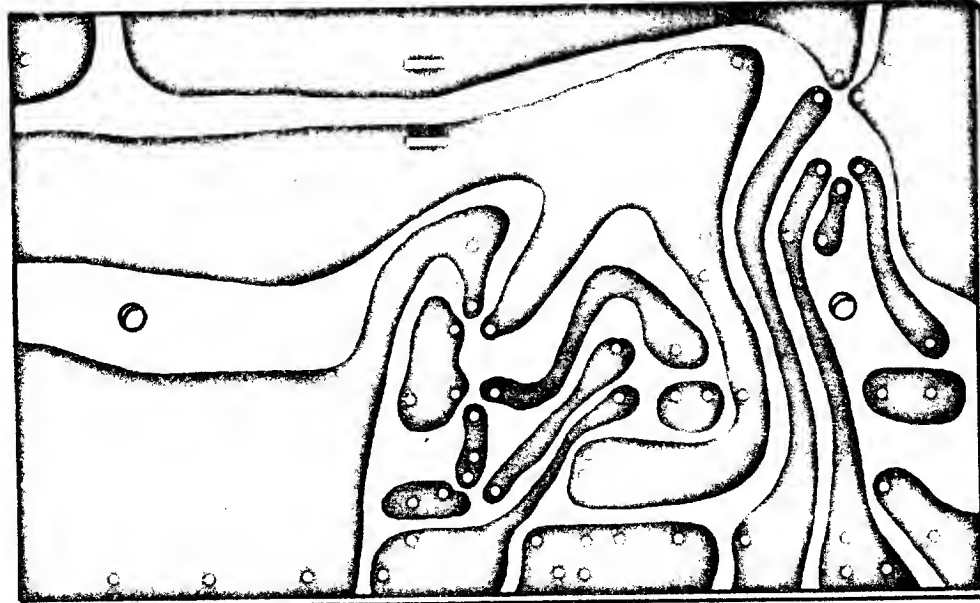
Component layout and wiring of the board. The printed circuit pattern is shown full size above
